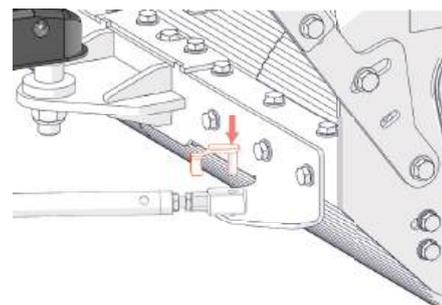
D - Secure steering cross-brace with clevis pin (self-steer only).
